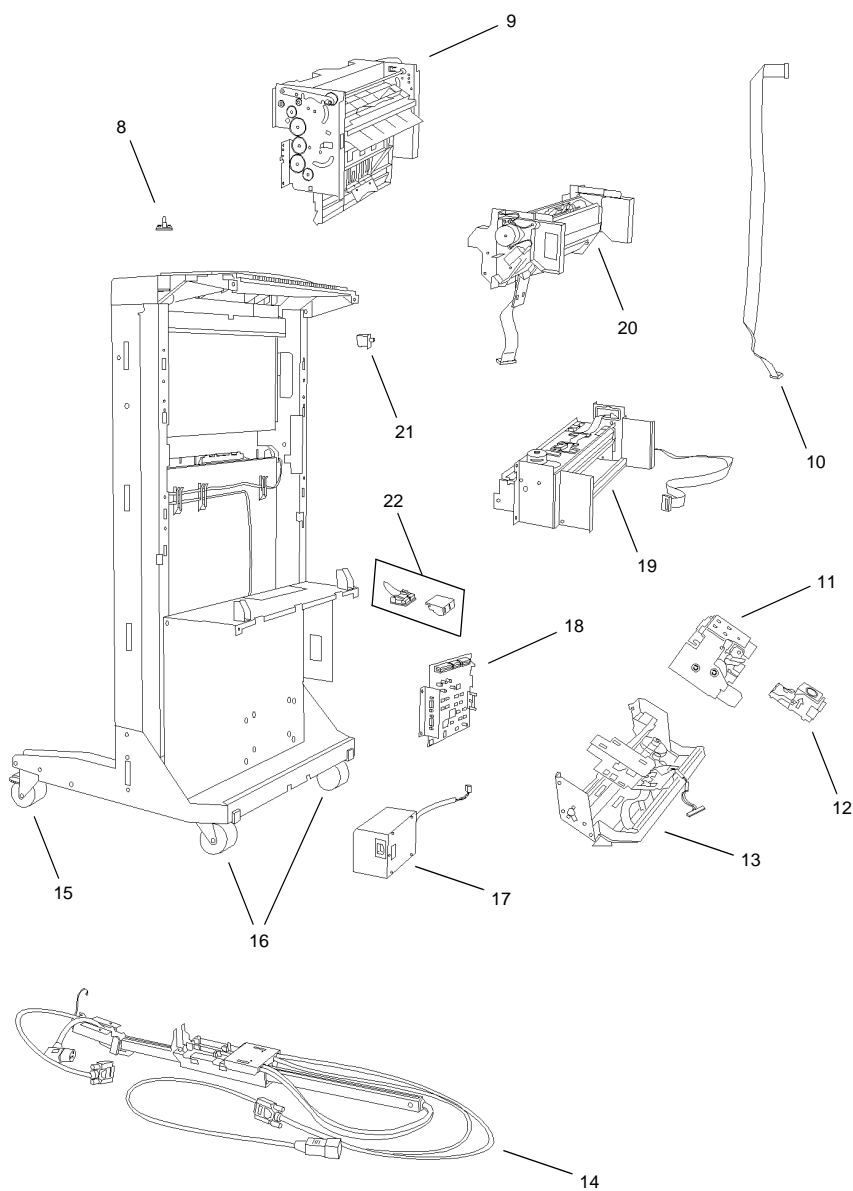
3,000-sheet stapler/stacker components (1 of 2)
